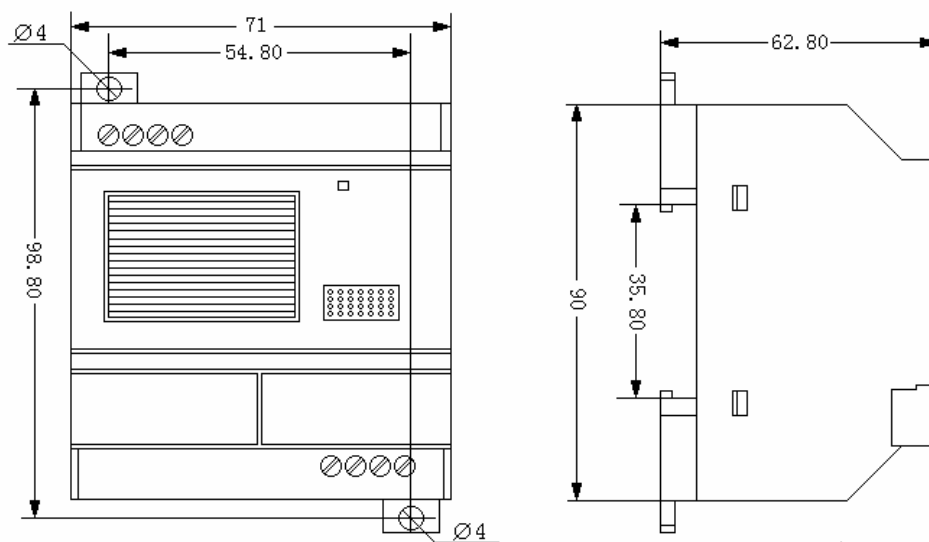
Installation Dimensions of SPR-VP Series Voice Module (mm)
